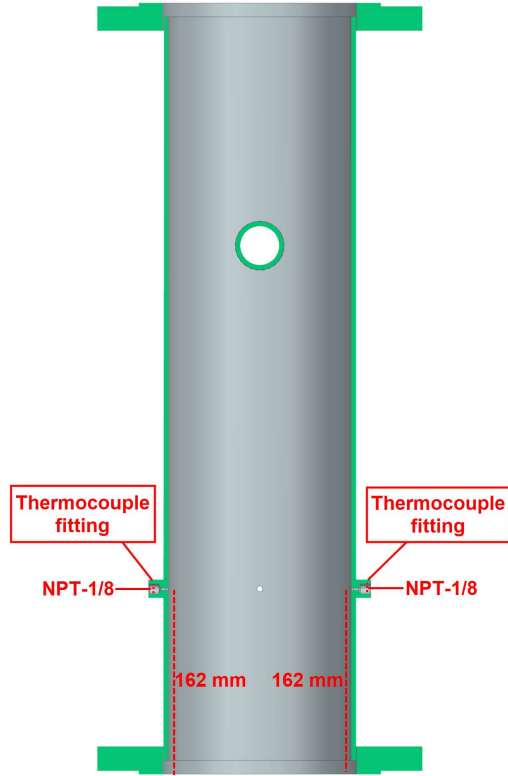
Plenum chamber assembly (cross-sectional view 2).
